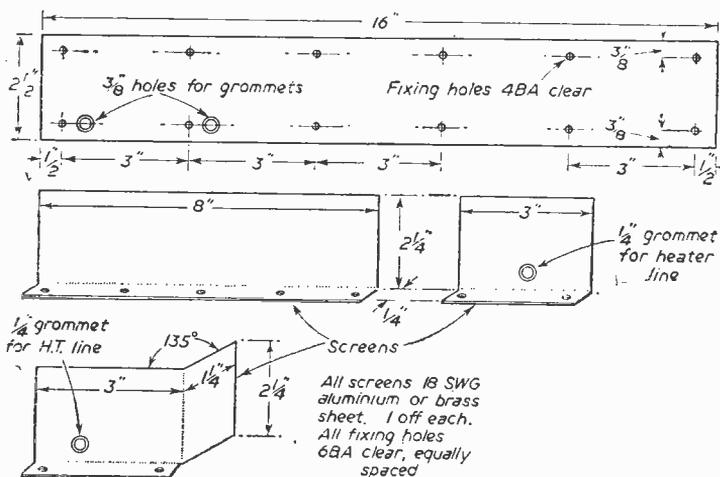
Common chassis side drilling, and details of underchassis screens.
